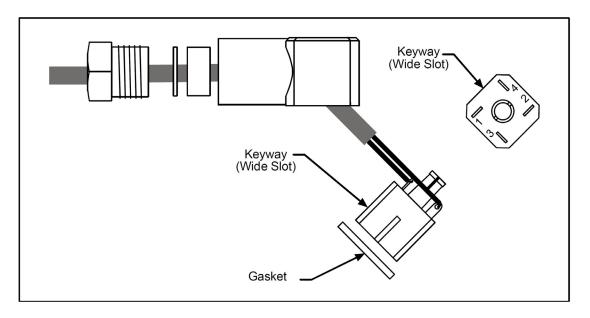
Air Pressure Transducer Cable: Wiring to Connector
